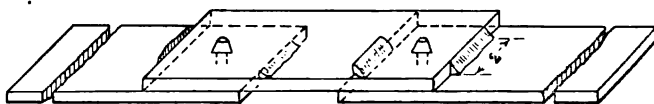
RIVETED AND FILLET WELDED.
